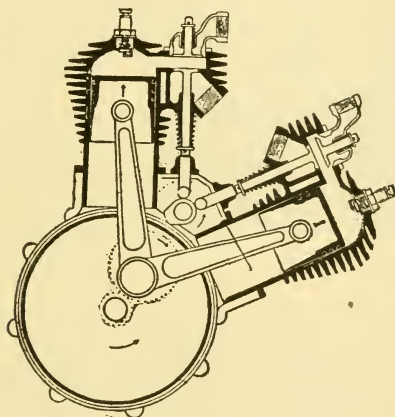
Sectional view of a "V" twin cylinder motor cycle engine. This type is in general use on the higher powered machines. Simplicity and lightness are secured in this design as one cam shaft and a single crank suffice for the two cylinders.
